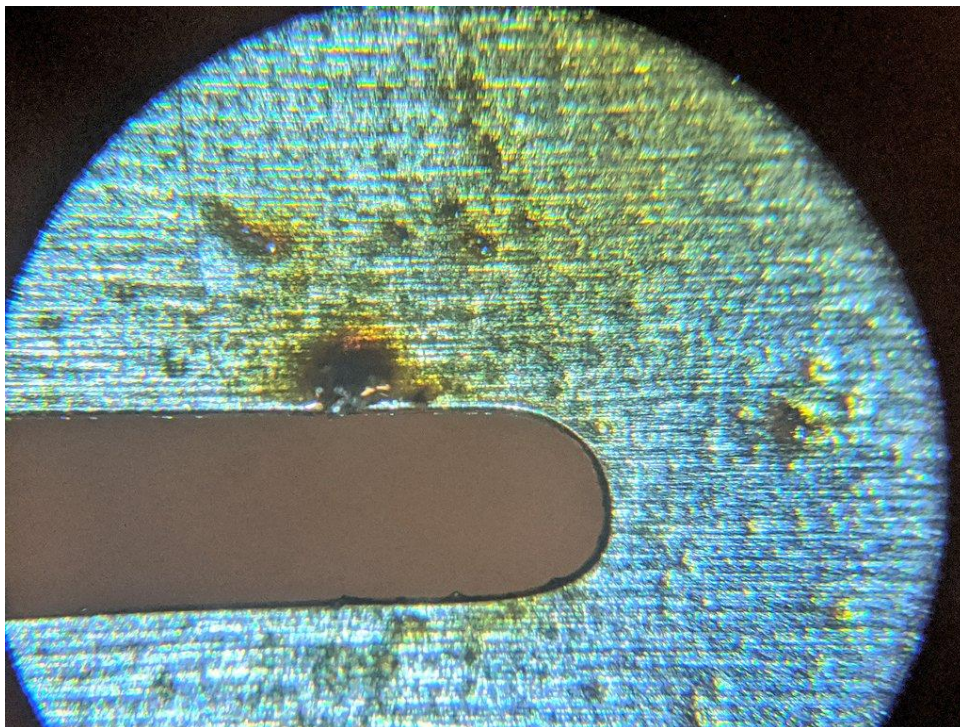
Microscope view of fuel charring and deposit on the back side of the extractor
